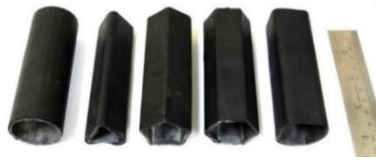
(a). 3D prototypes of tool handles corresponding to chosen five cross-sections: Design I-V)
